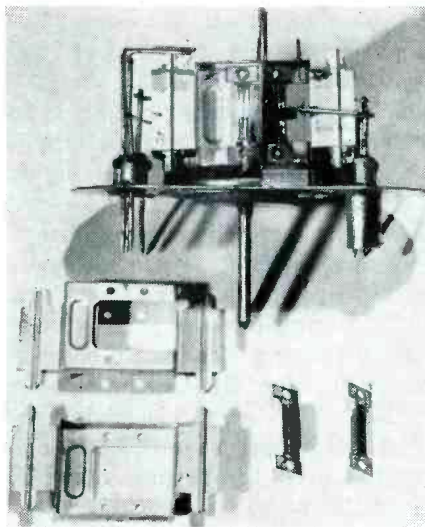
Internal structure, frame stampings and deflection plates of experimental beam-deflection tube
